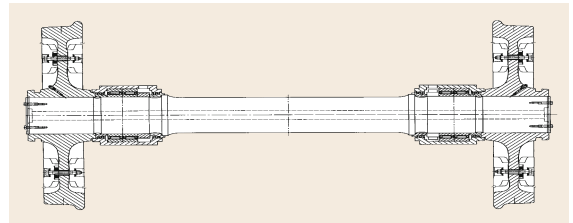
Leila freight car wheelset for 22.5-t axle load with inside bearings and wheel brake disks 920-mm wheel diameter new, gauge 1435 mm, weight 1392 kg with bearings and aluminum brake discs (not to scale)
